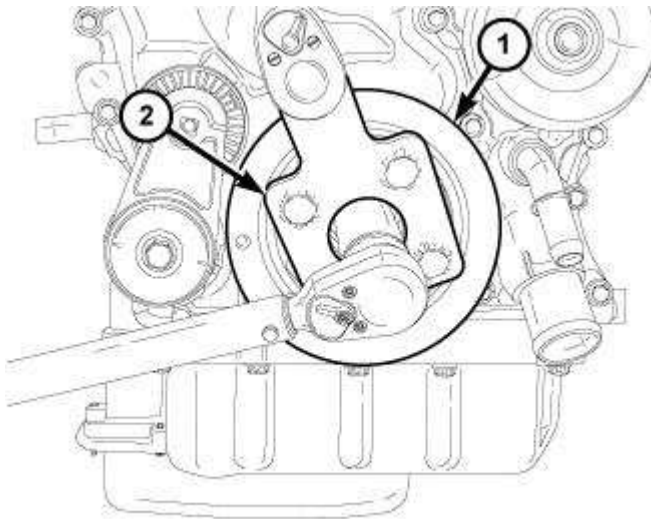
Crankshaft Vibration Damper & Vibration Damper Holder
